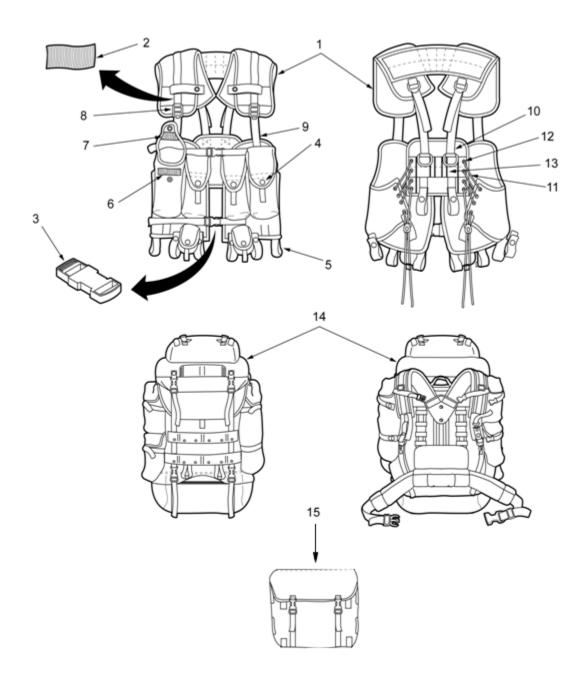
Load-Bearing Equipment (Sheet 1 of 3).
